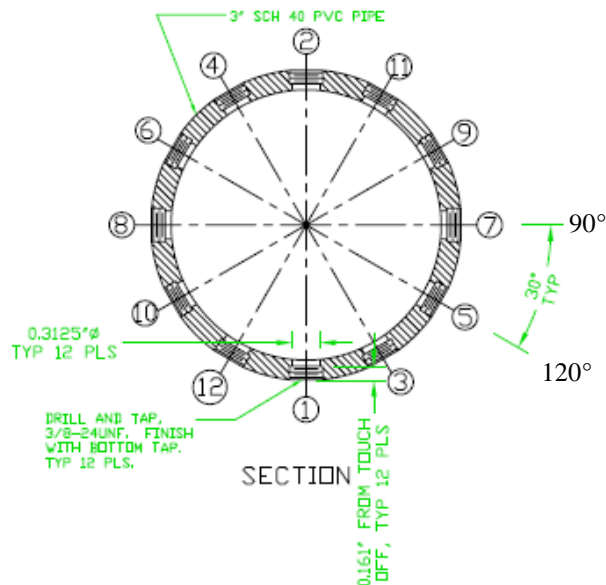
Plan view of the pipe shown in preceding figure to illustrate placement angles between the twelve coupons.
